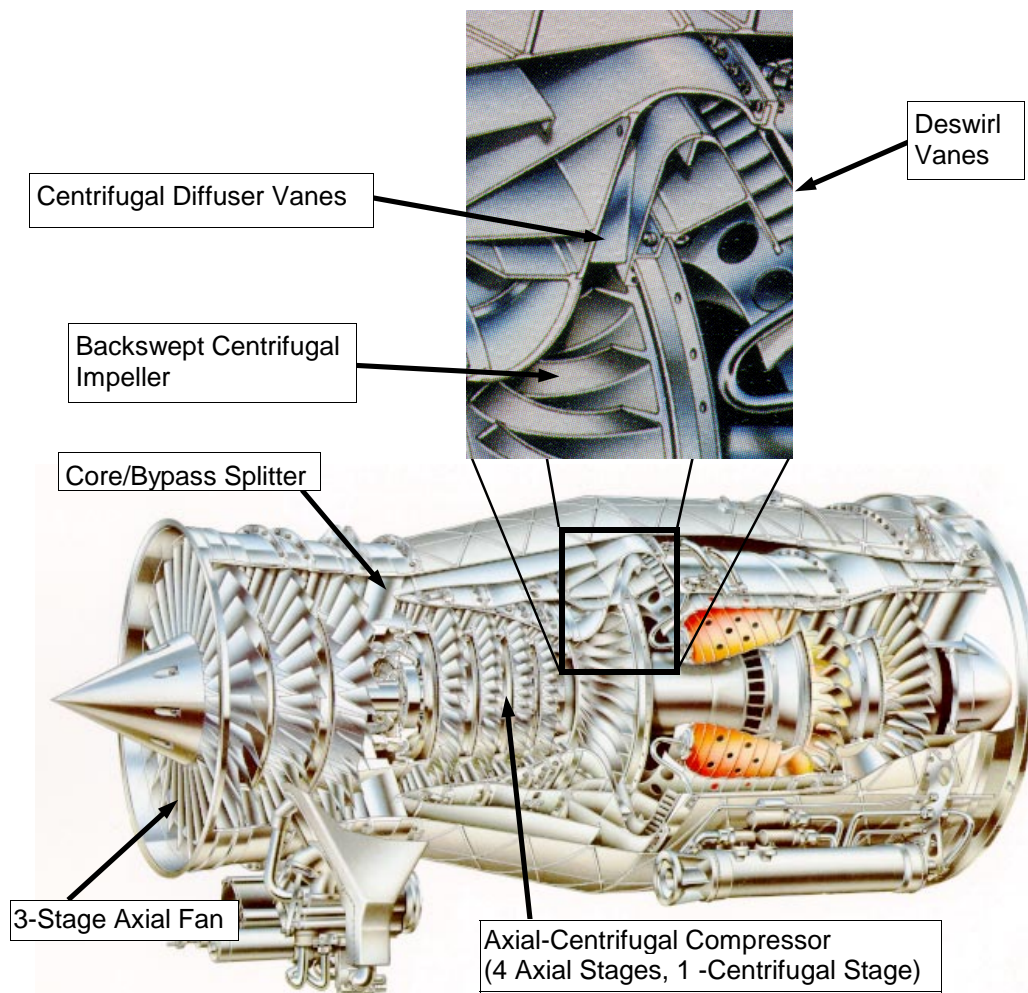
Detail Showing Parts of a Typical Axial-Centrifugal Compression System in an Engine, Here the TFE1042 w/o the Afterburner
